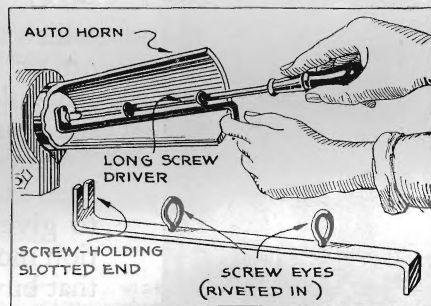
A slotted piece of flat iron or brass strip serves as a good and simple screw holder.
